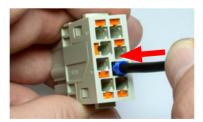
Spring-loaded blade in the contact chamber (\Rightarrow Chap. 3.1, 4 + 5) and tool-free assembly with wire ferrule
